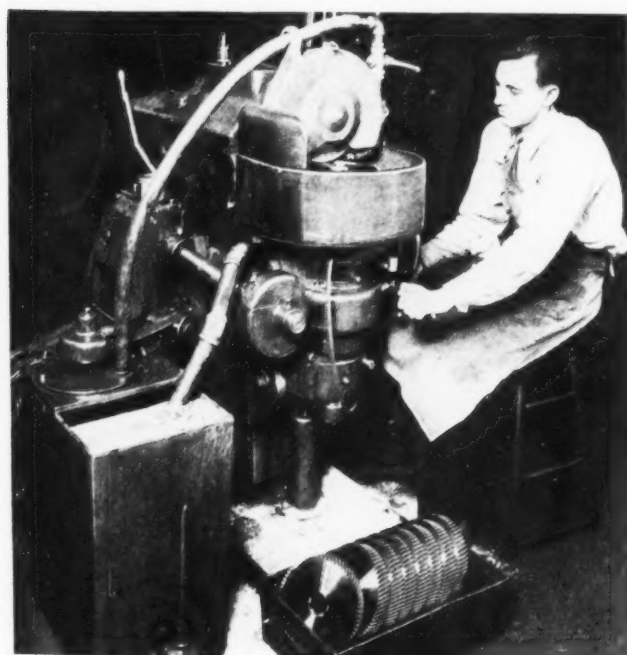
Grinding One Face of Gears Accurate with the Splined Bore by the Use of a Special Arbor
